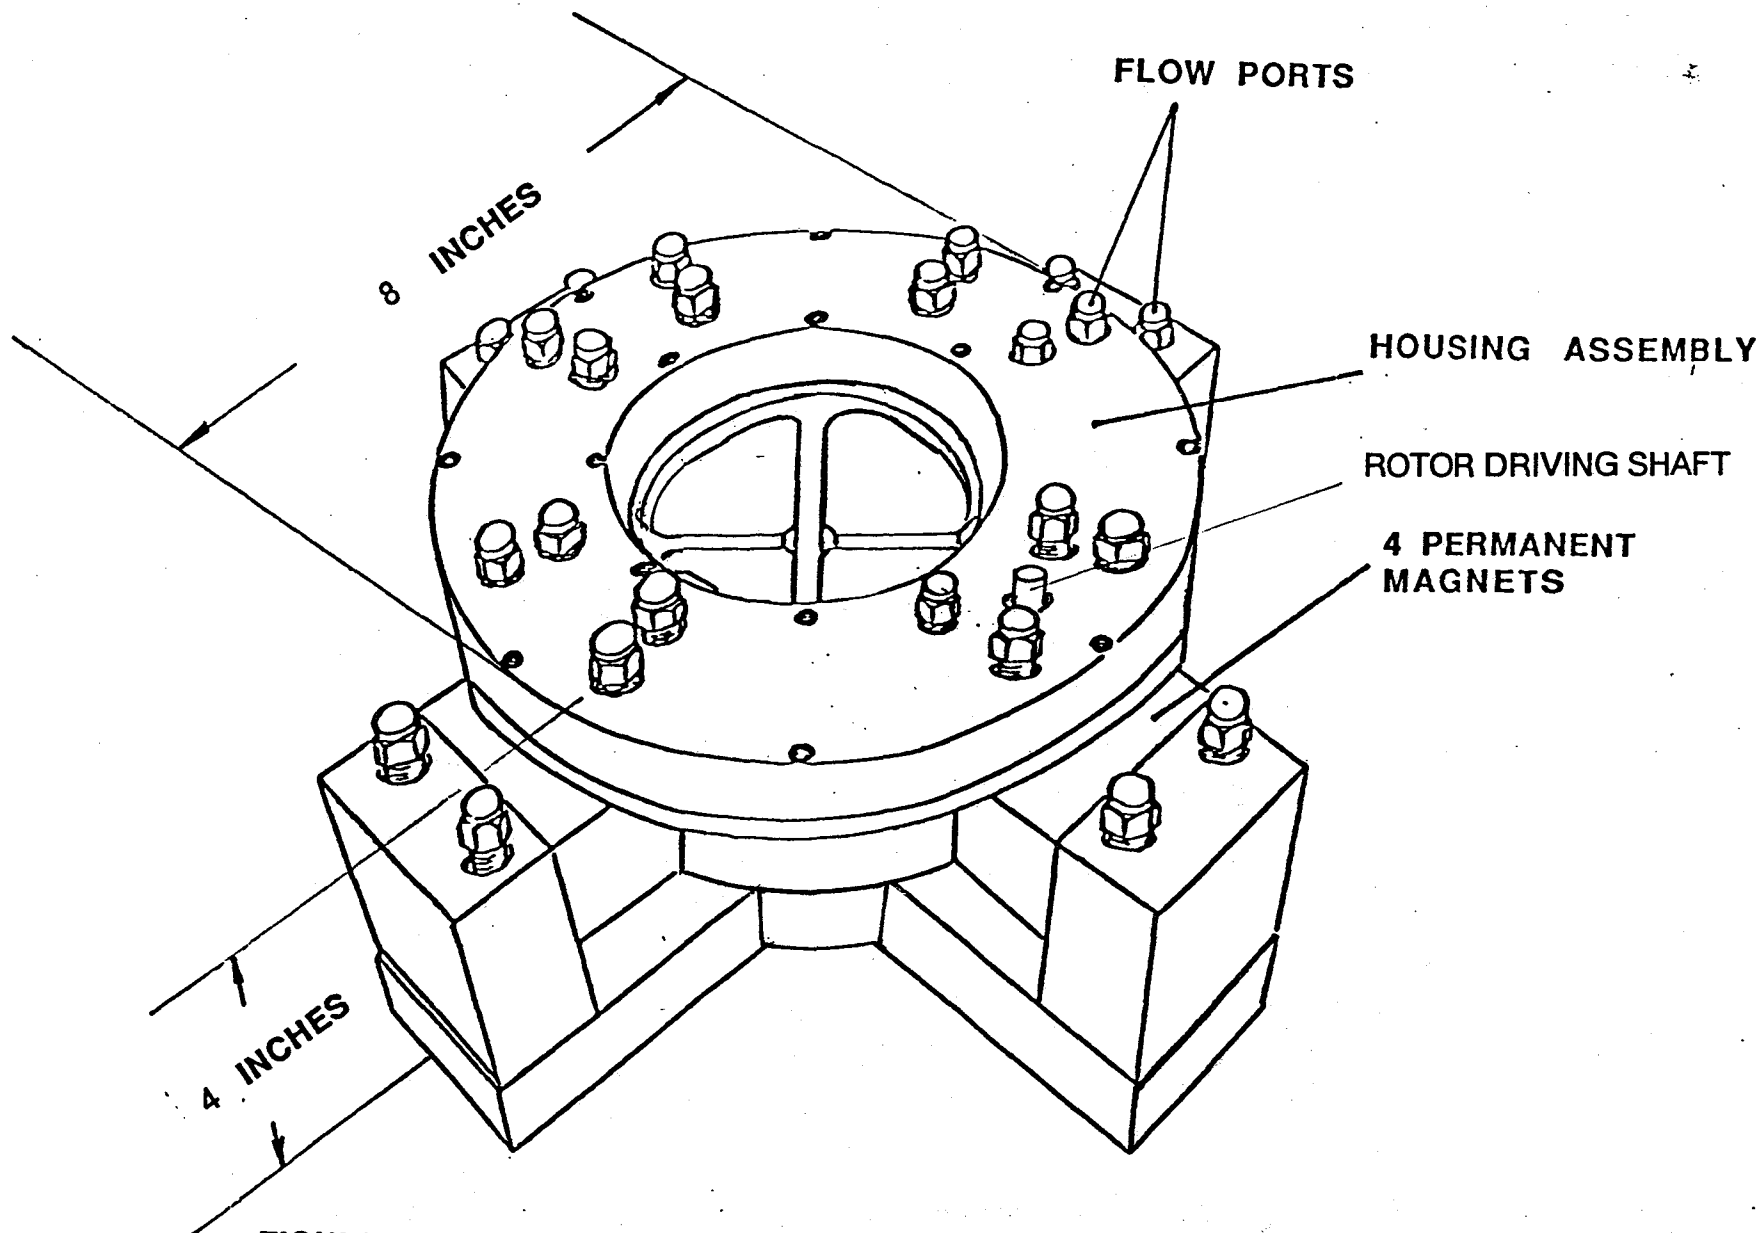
PICTORIAL SKETCH OF A MAGNETIC HEAT PUMP HOUSING ASSEMBLY
